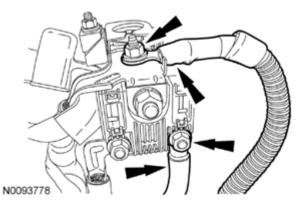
Locating Battery Cables And Nuts Courtesy of FORD MOTOR CO.
